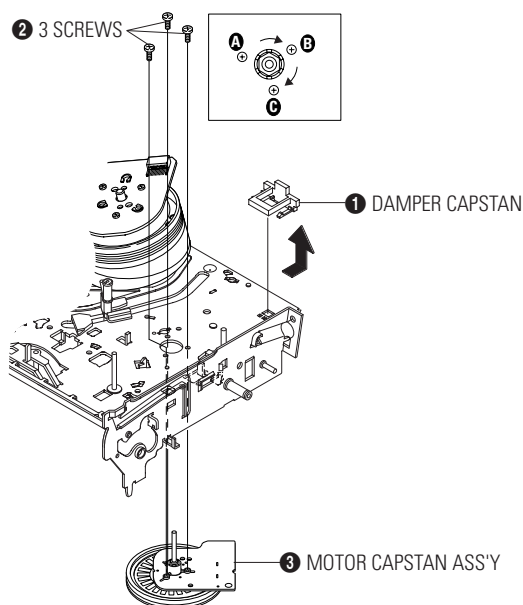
Damper Capstan, Motor Capstan Ass'y Removal
